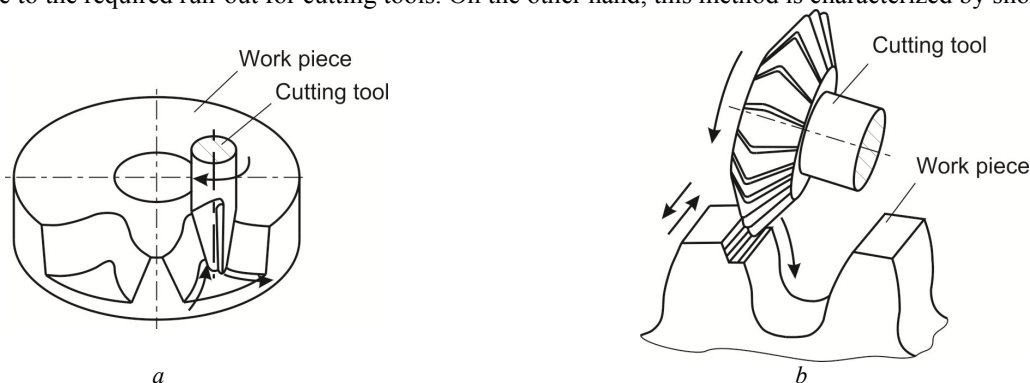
Gear machining with shank and disc milling cutters according to Roth 6
